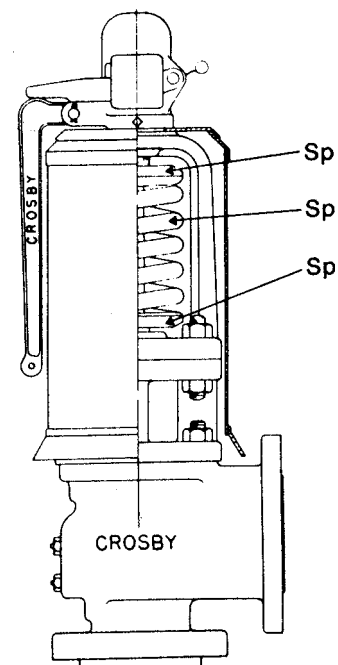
Spring washers are custom fitted to springs for proper alignment and must be changed when springs change.
